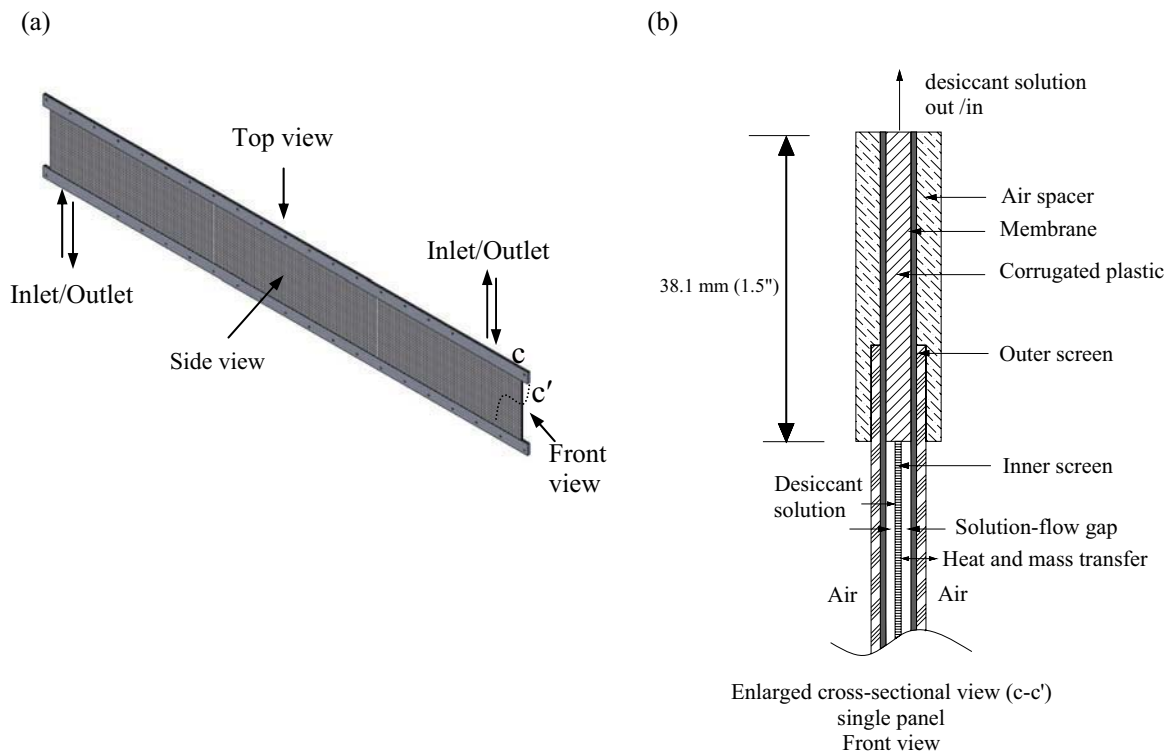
a) 3D-view and b) cross-sectional front view of a liquid panel
